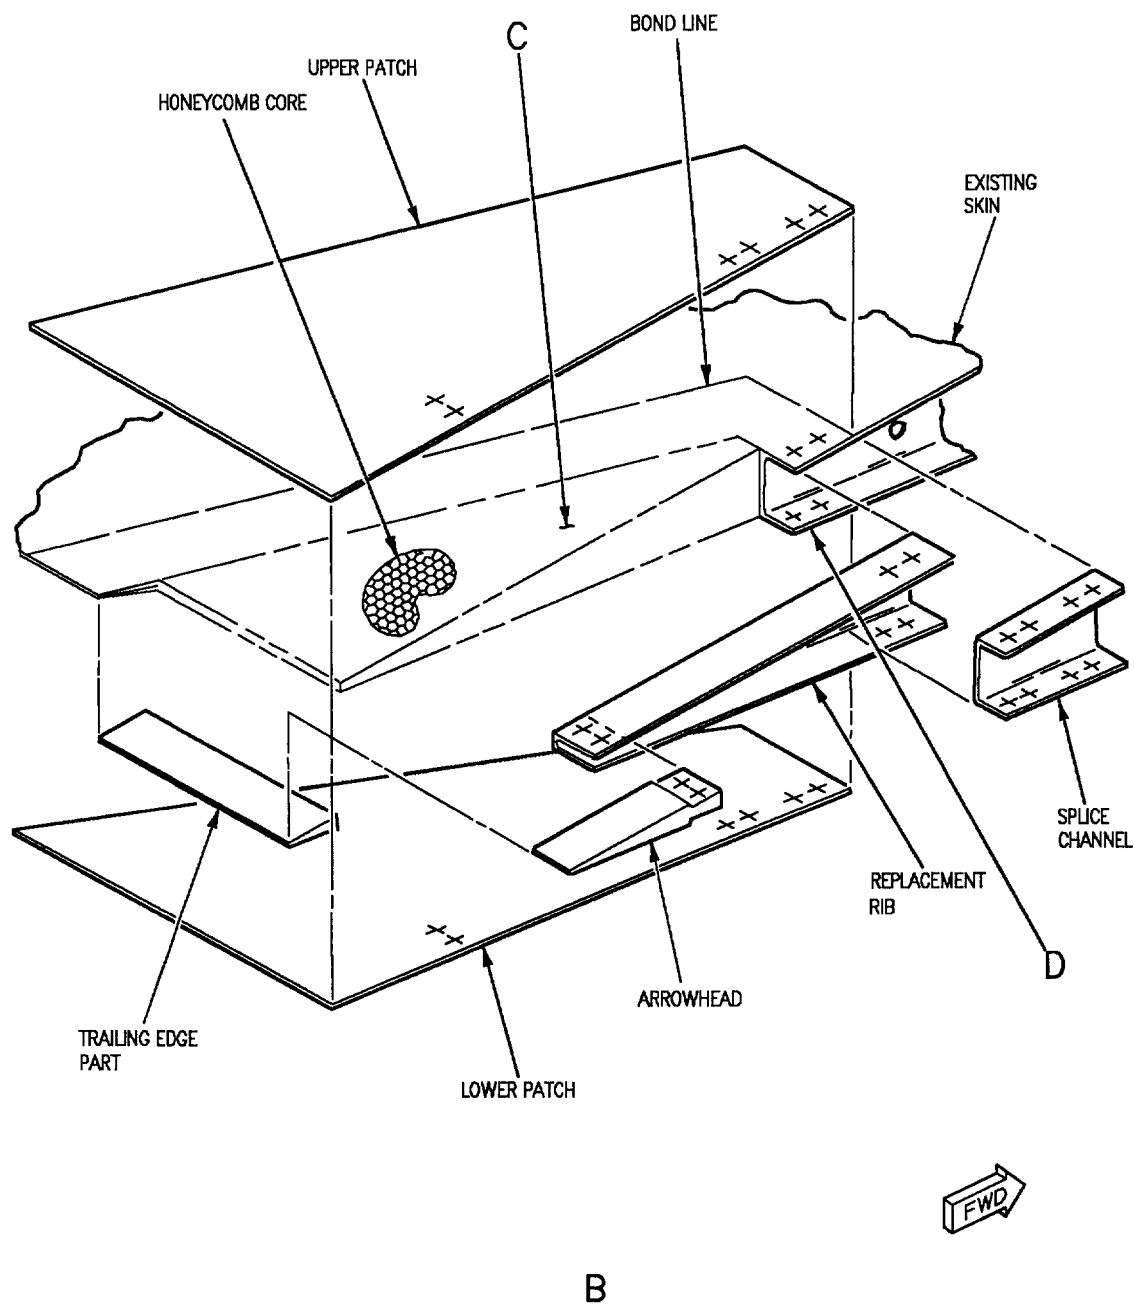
Trailing Edge Inboard or Outboard Corner Repair With Rib Fabrication
